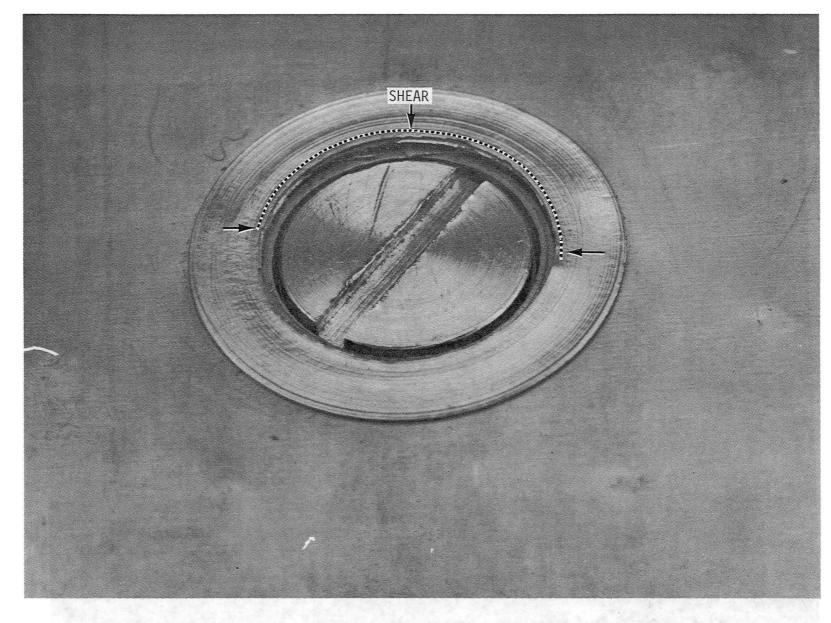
Typical Shear of Fastener Insert Flange Failure Mode
